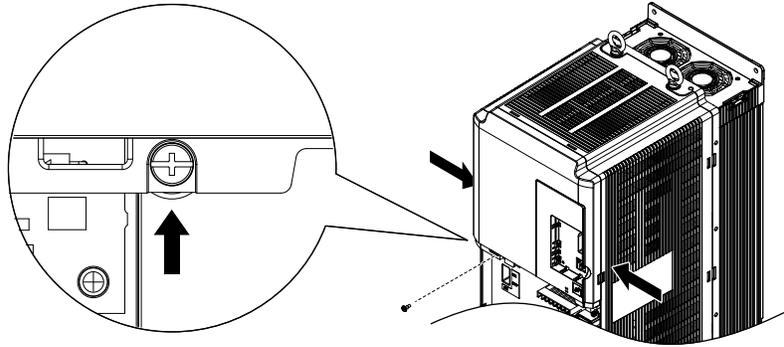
Remove the Front Cover (Drive Models 2□0028 to 2□0130 and 4□0011 to 4□0124)
